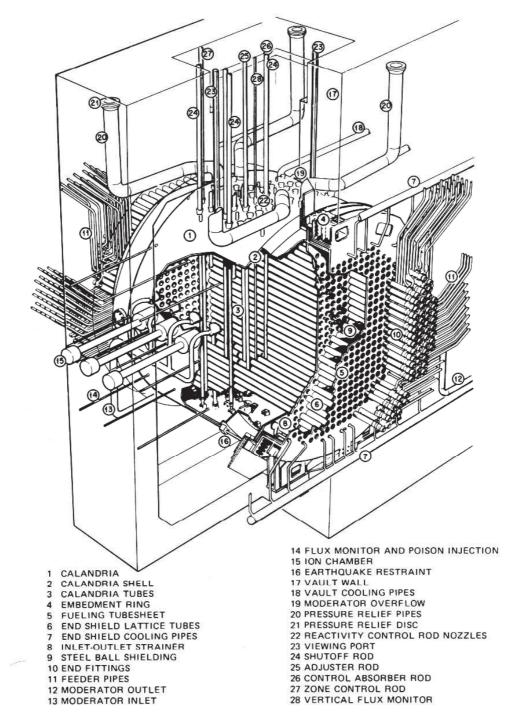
The cutaway view of a CANDU reactor assembly (Adapted from [39]).
